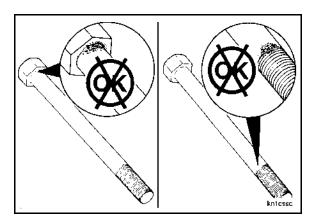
VISIBLE CORROSION AND PITTING NEAR THE FILLET AND THREADS
